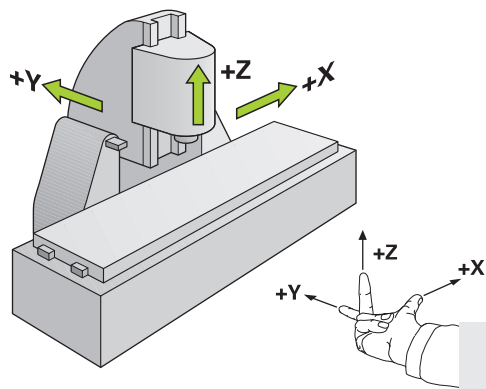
Assignment of the rectangular coordinate system to the machine axes
